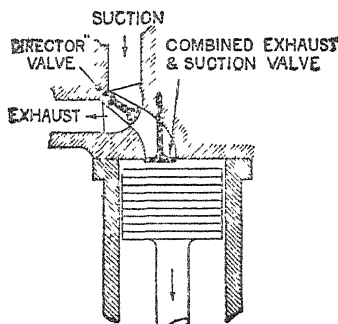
Beardmore-Tosi valves. Beginning of Firing-stroke, Piston top-centre. Both closed.
